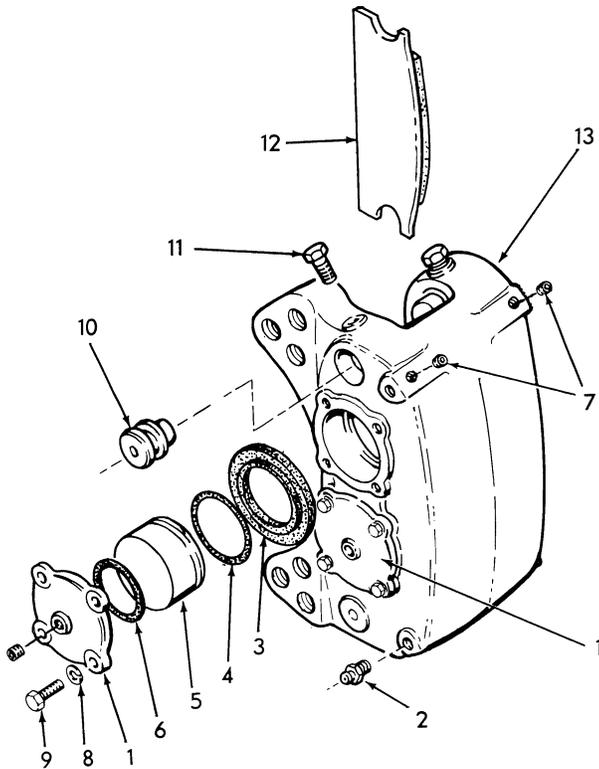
BRAKE HEAD ASSEMBLY T-80386
